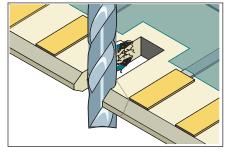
Mill out damaged area using a carbide end mill.
